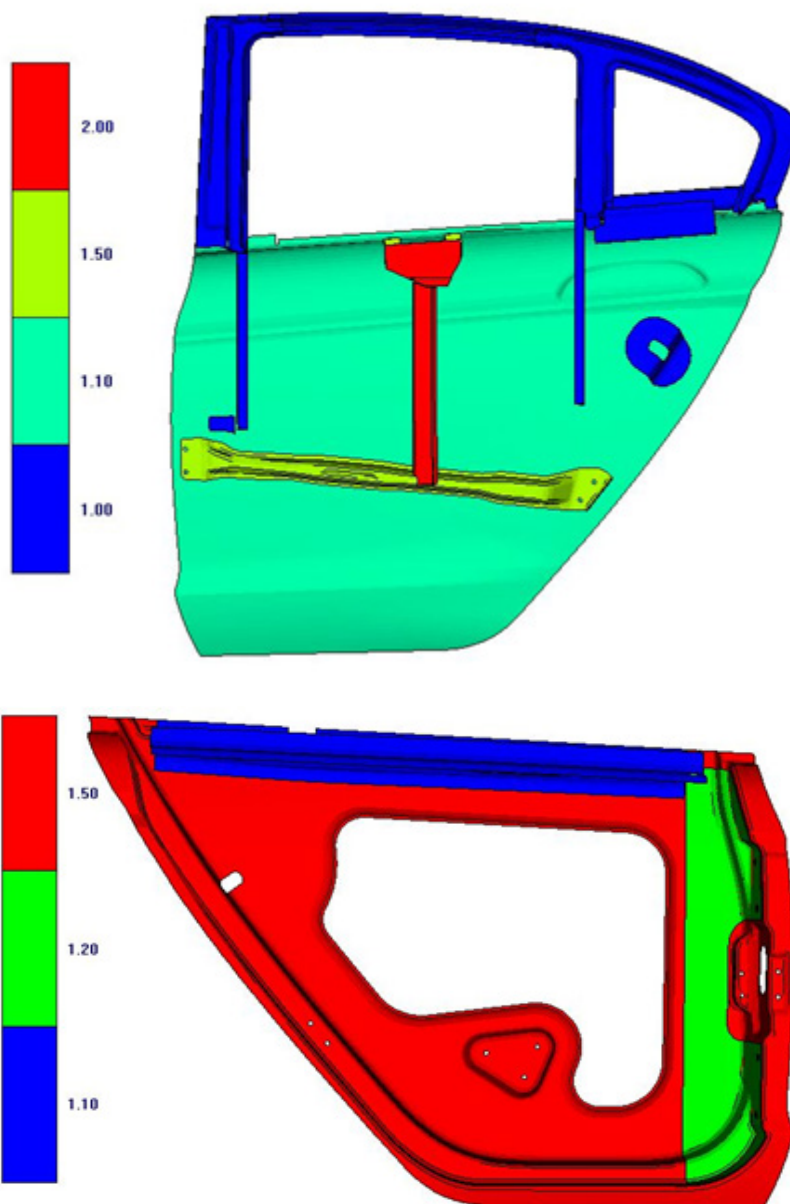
LWV Rear Door Frame Aluminum – Thickness (mm) Map
